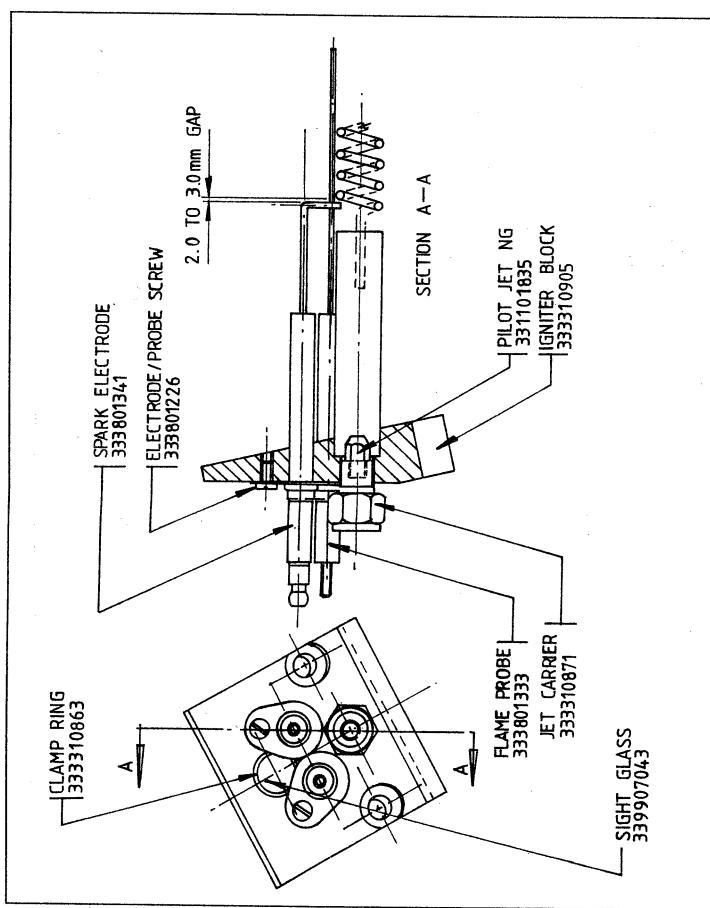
Wessex 50 kW Mk IV Pilot Burner Assembly (363310387)
